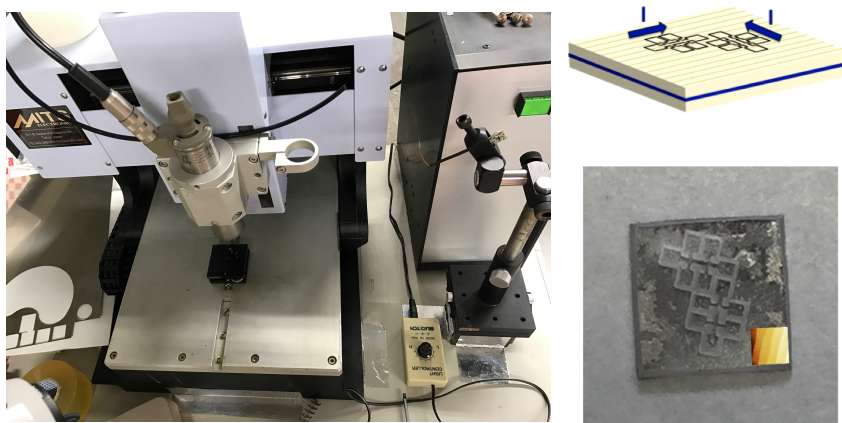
Mechanical milling machine and Hall bar geometry.
